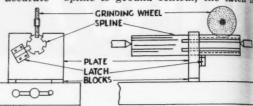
(Left)—Showing how gage is used to determine accuracy of width of spline and diameter of shaft. Fig. 5-(Above)-Diagram showing method of setting up machine to grind splines correctly.
